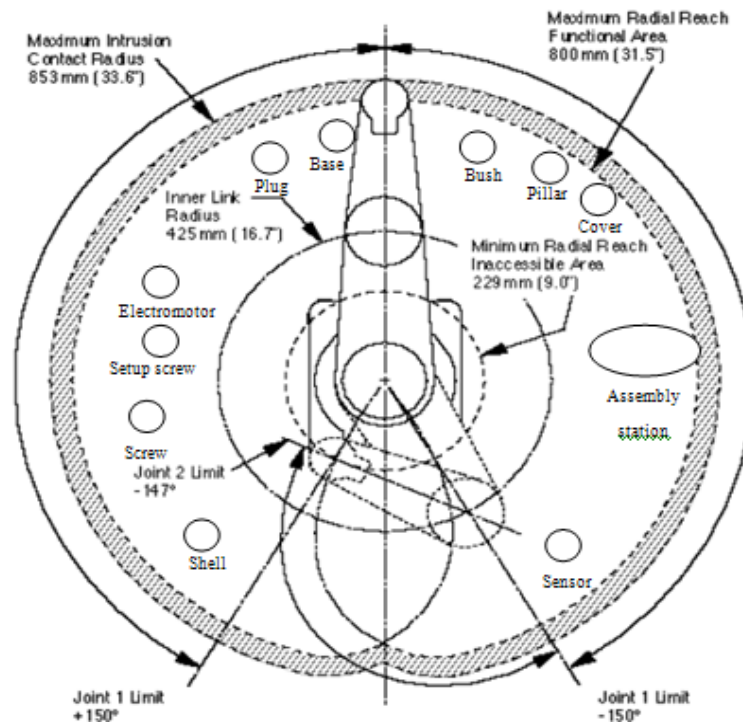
Workcell-1 for driver assembly with Adept-one Robot
